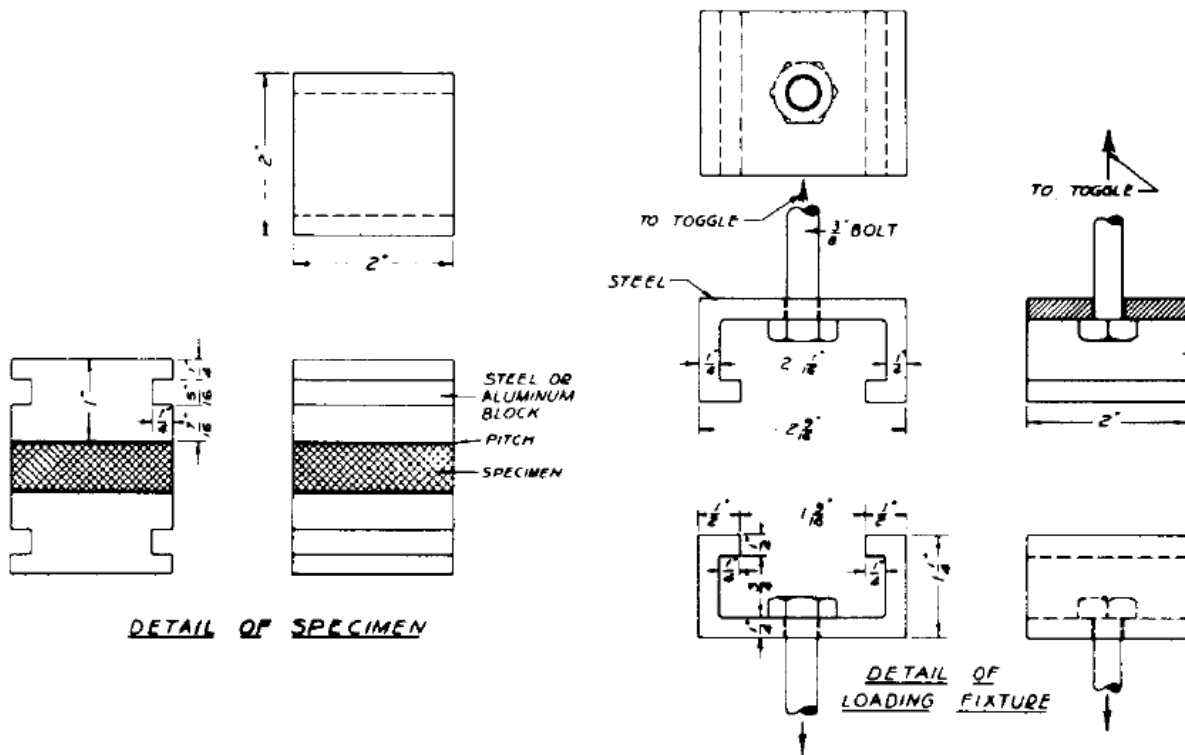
Detail of specimen and loading fixture for internal bond measurement [10]
